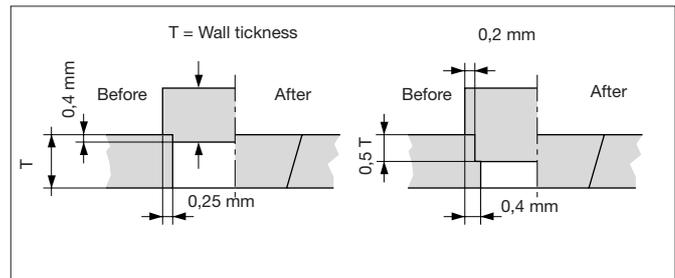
Stud welding – Plugs in thin-wall parts
